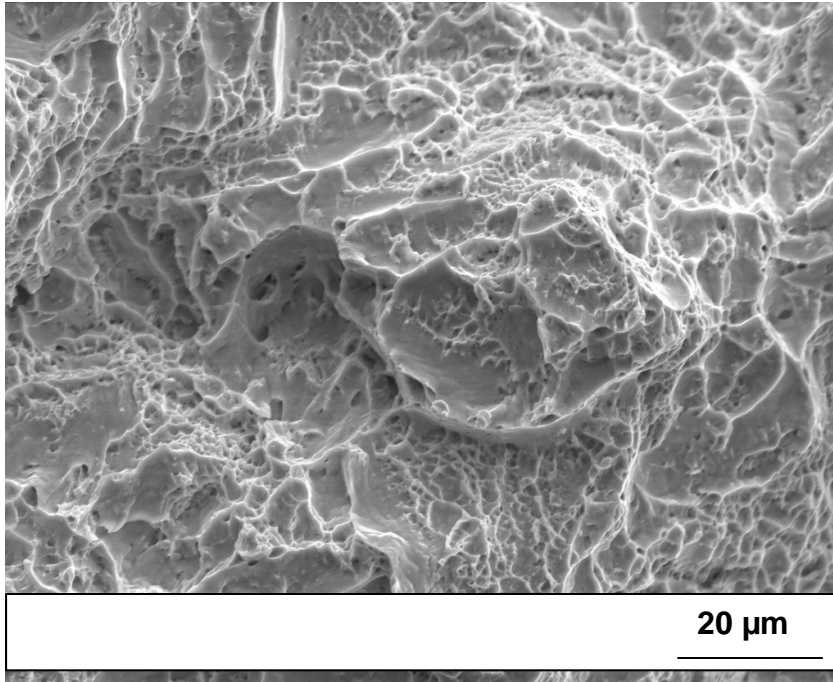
Fracture surface of an as-received specimen showing a typical ductile fracture with dimples associated with ductile metallic ligaments.
